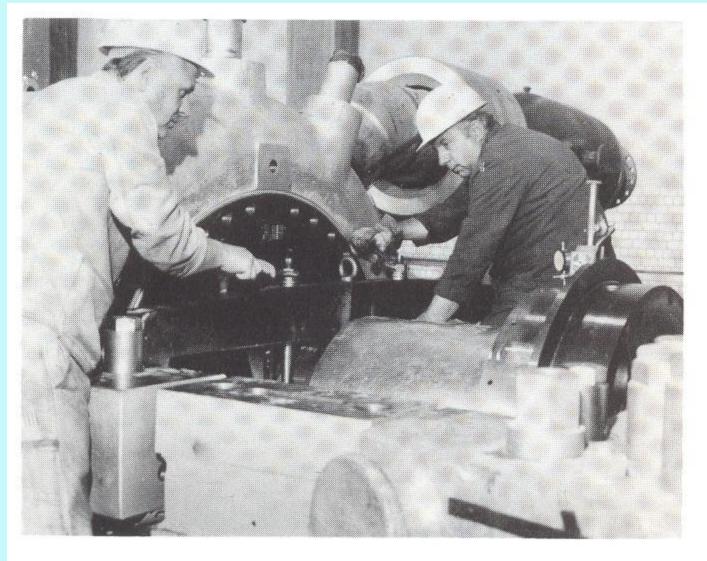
Checking Radial Clearance of Assembled HP Turbine Section
